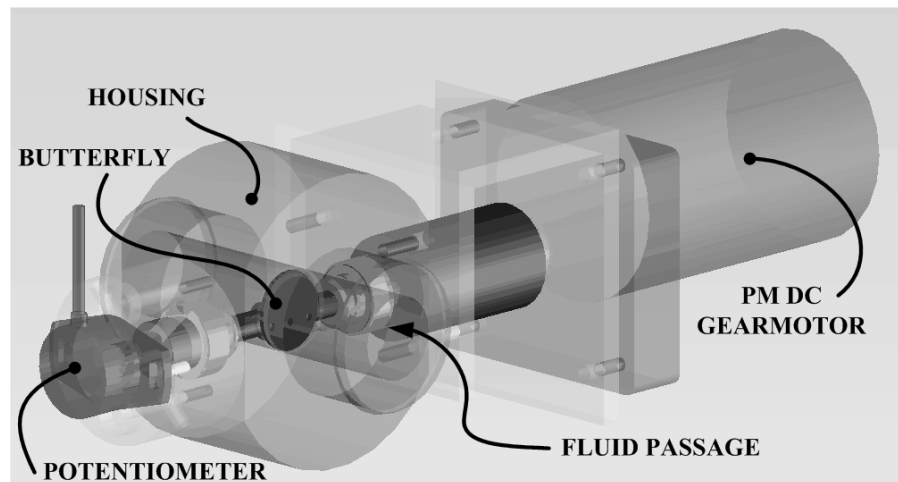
Prototype smart valve assembly with integrated servo-motor and rotational potentiometer
